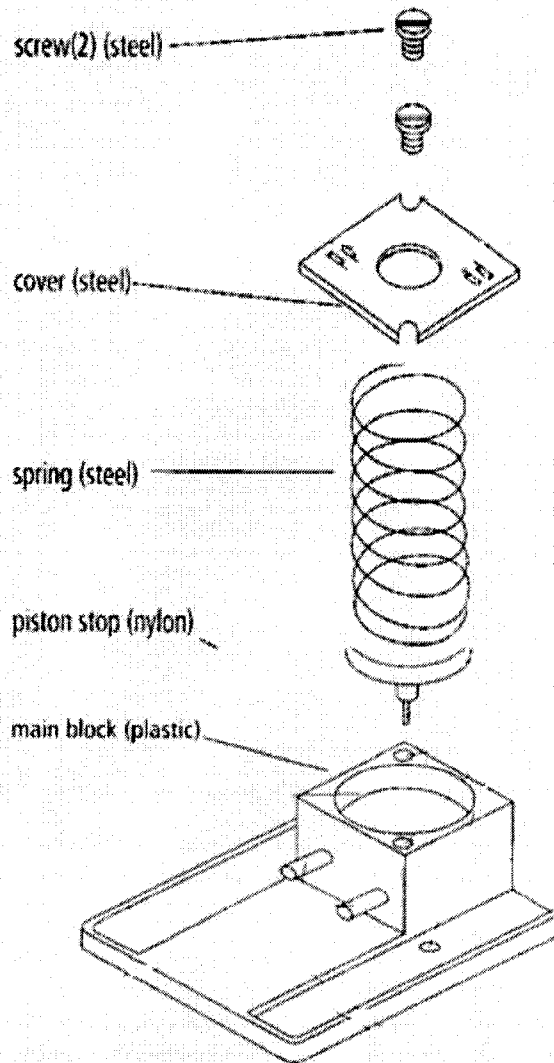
Pneumatic piston sub-assembly (Before DFA), [Boothroyd and Dewhurst, 1987]
